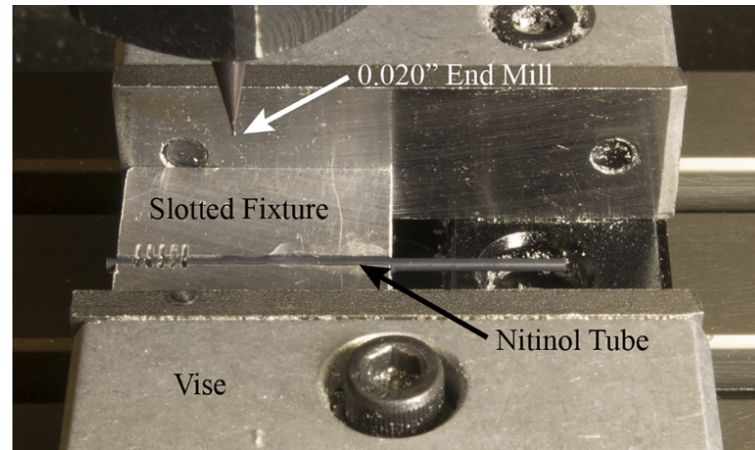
Fabricate the wrist by using a CNC manufacturing process with 0.02 in end mill [Swaney 17].
